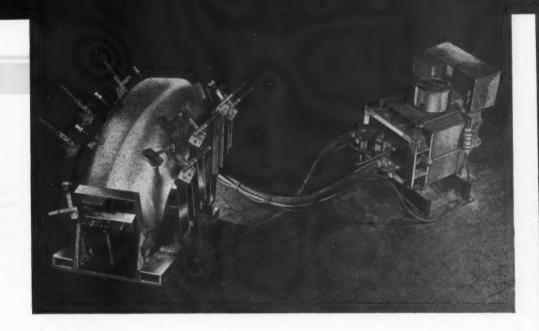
Automatic Resistance Welding Machine which is Used to Join Fourteen-gage Reinforcements to Under Side of Eighteen-gage Floor Pans
